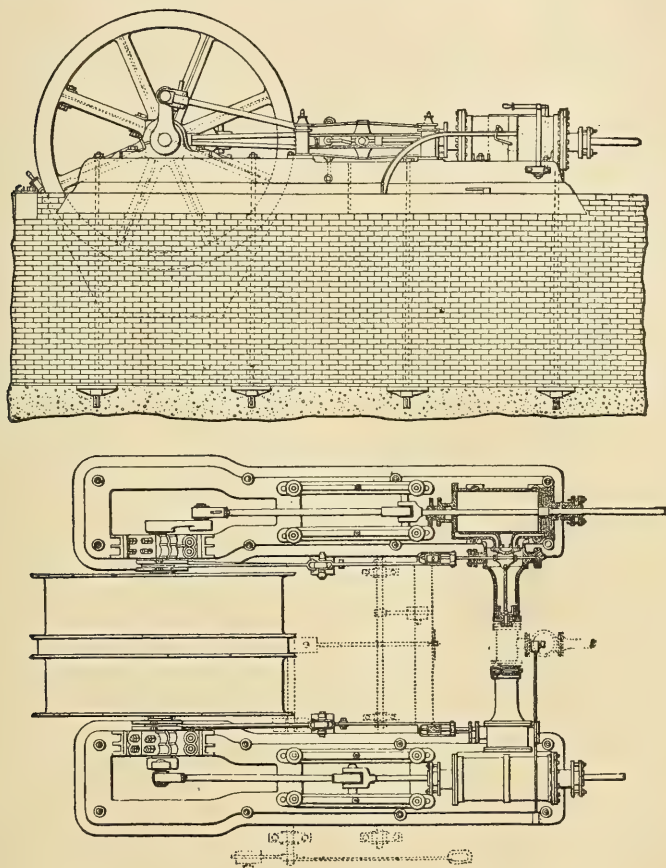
Colliery Winding Engines. Side Elevation and Ground Plan.
